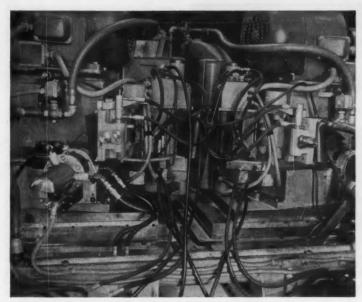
Hoglund contour dressers keep the 30-inch grinding wheels of the machine in Fig. 1 properly dressed for taking a multiple number of cuts simultaneously on the work-piece
